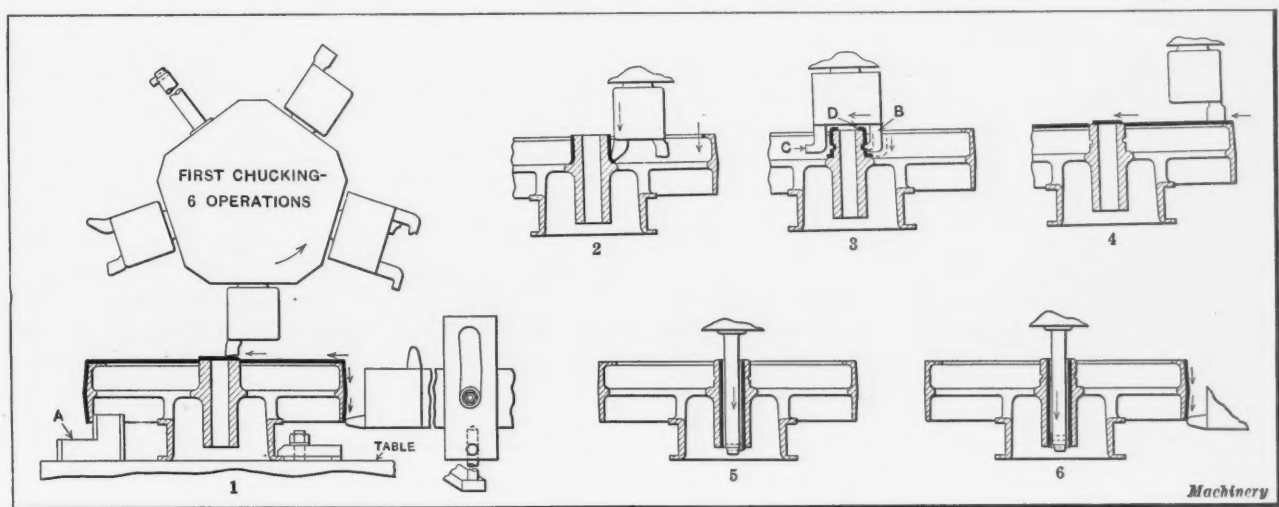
Tooling Lay-out, showing the Operations Necessary to machine One Side of the Pulley shown in Fig. 8
